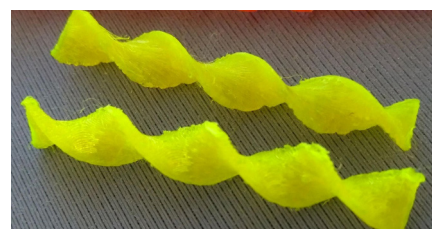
Turbulence promoter 3D printed in horizontal position after removing supports
